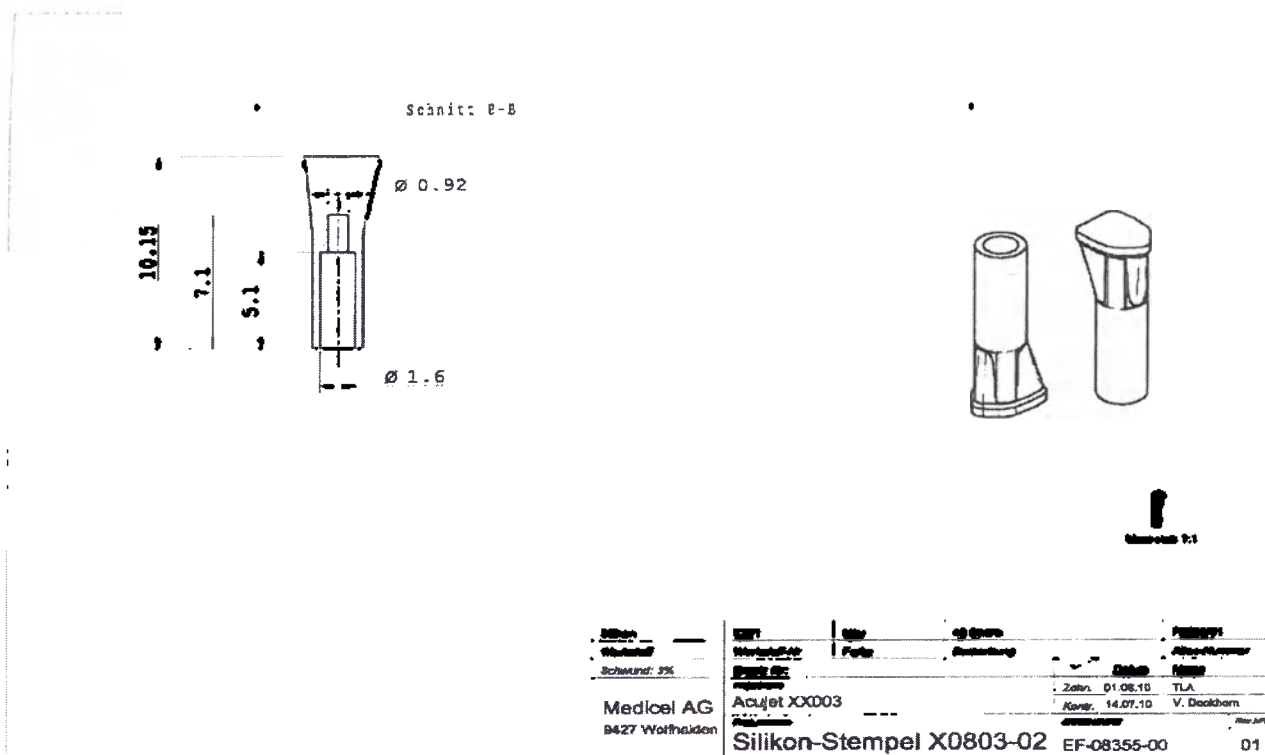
Original manufacturing drawing of the Plunger tip of IOL Injector, INJ100 (dimensions are introduced in millimeters).
